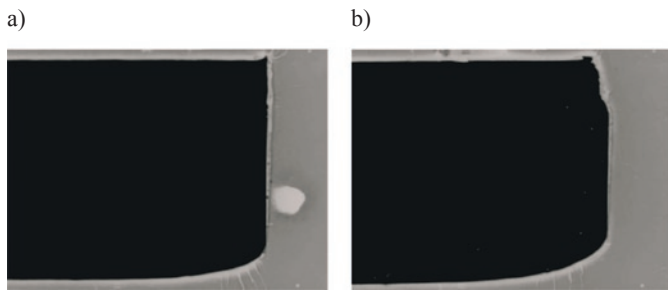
Part cross-section for initial cuts with blanking clearance a) 0% and b) 8%
